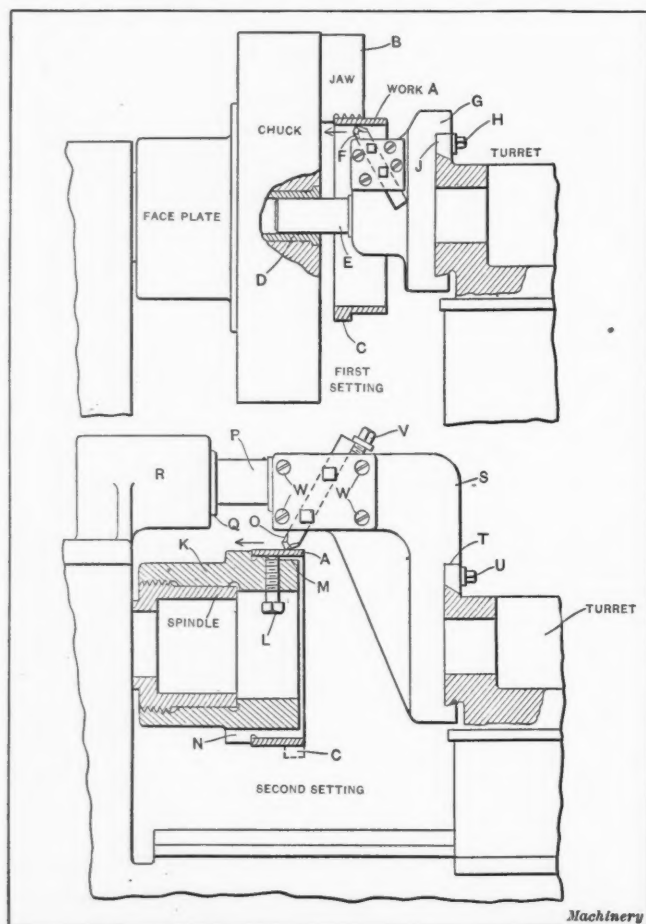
Machining a Thin Steel Casting on a Horizontal Turret Lathe
